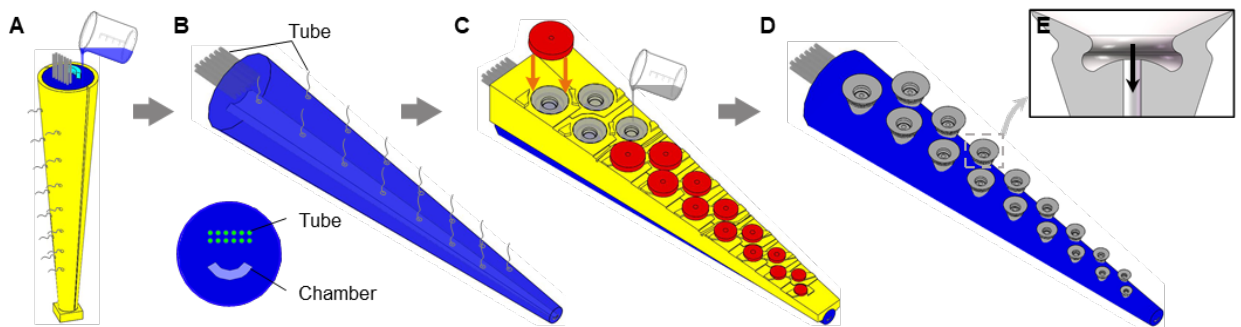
Fabrication process of the tapered soft actuator with suckers. (A) 3D printed molds are used to cast the robot using elastomer Mold Star 30. (B) The cured soft actuator has silicone tubes embedded inside, which were ultimately used to apply a vacuum to the suckers. The cross-sectional view shows the arrangement of the inner chamber and silicone tubes within the actuator. (C) A 3D printed mold for the suckers is assembled on the actuator and elastomer was poured into the mold. Then, 3D printed caps were laid on the mold to create the shape of the suckers as the elastomer cured. (D) The fully cured tapered actuator with suckers was then complete. (E) A cross-sectional view of the suction cup is shown. The aforementioned silicone tubes were embedded within each of the suckers to apply a vacuum (the arrow indicates the vacuum air flow).
